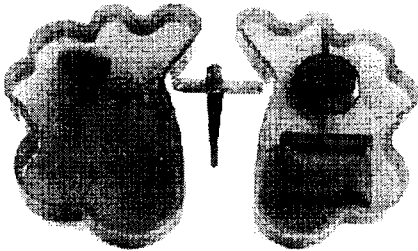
A product molded by the injection molding process of the family mold type with two balanced runners
